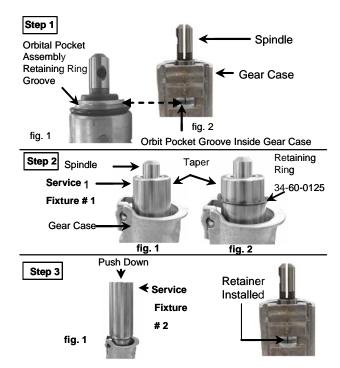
Visually check gear case opening to make sure orbital pocket groove is above gear case casting prior to proceeding to step 2.
